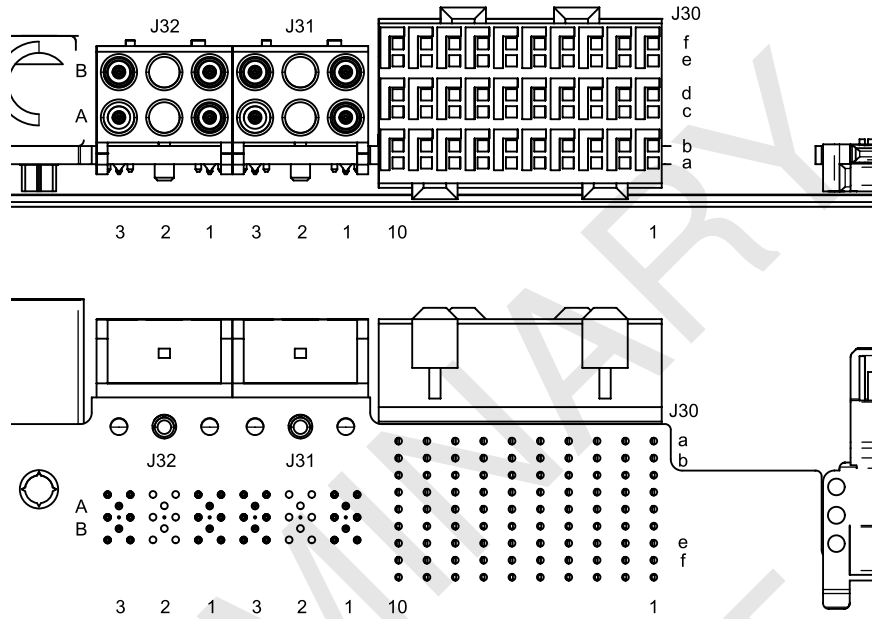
Zone 3 connectors AMC back side view (above), bottom view (below)
